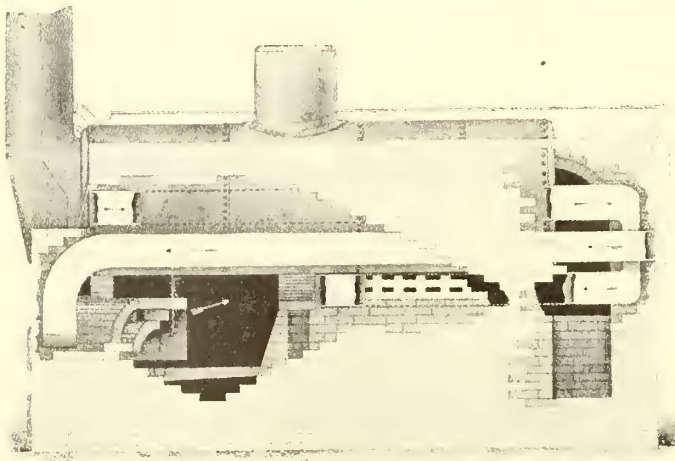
FULL SIDE ELEVATION OF CYLINDRICAL HORIZONTAL RETURN FLUE TUBULAR BOILER, SHOWING CONSTRUCTION OF SMOKE-CONSUMING FURNACE.
